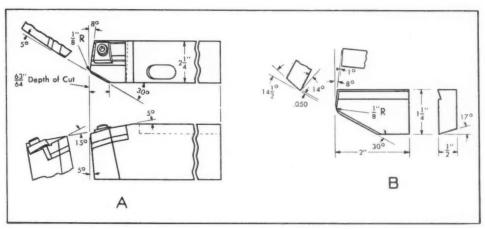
(A) Design of Clamped-on Carbide-tipped Tool Shown in Fig. 3. (B) Detail of Carbide Tip for This Tool
